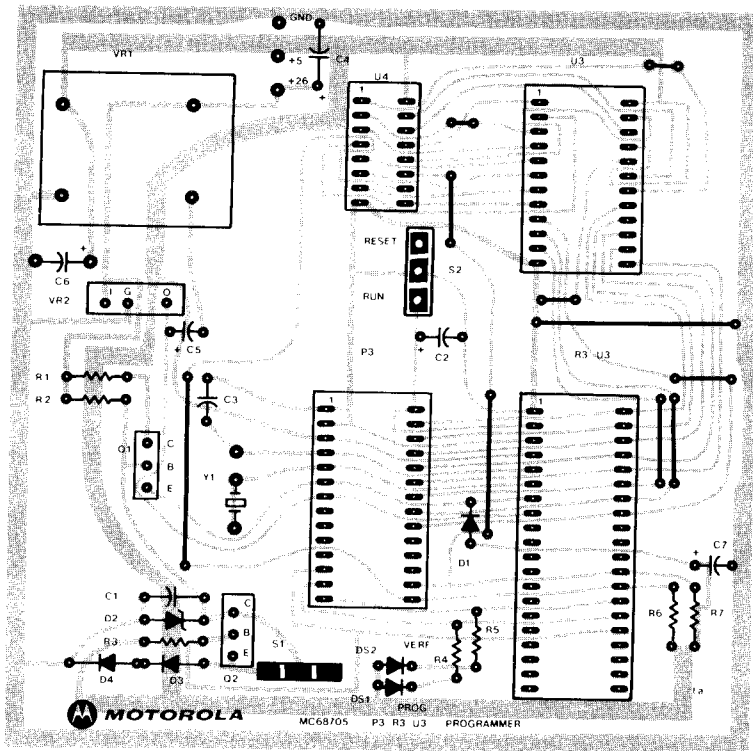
MC68705P3/R3/U3 Programming Module Parts Layout
